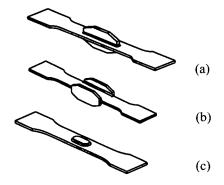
Shapes of specimen of (a) non-load carrying box fillet weldment, (b) weldment with gussets on plate edge and (c) weldment with padding plate on both sides
